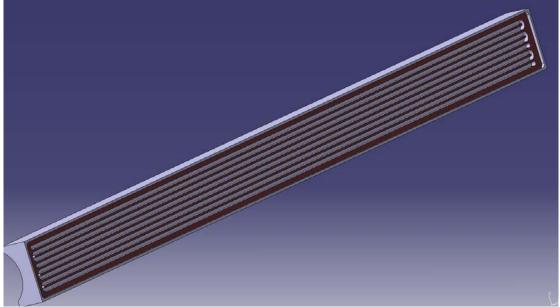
Cooling circuit is directly machined on the jaw. The brown surface can be used for the brazing.
